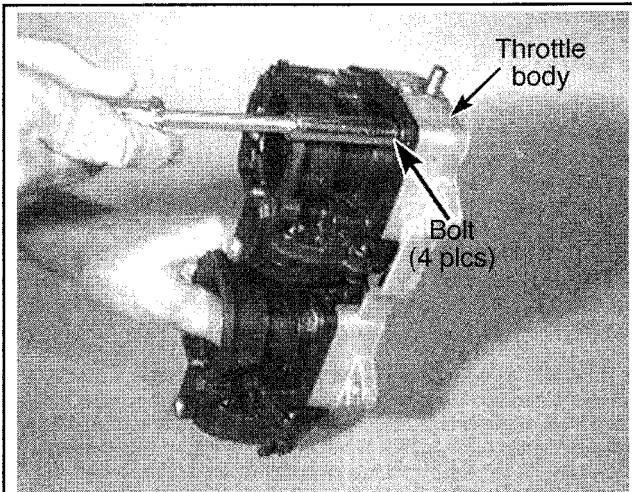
If note done already, remove the carburetor-to-throttle body bolts...
